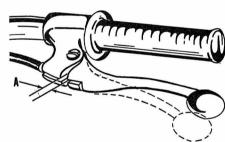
Clutch hand lever should have 0.08-0.12 in. free play at A.
